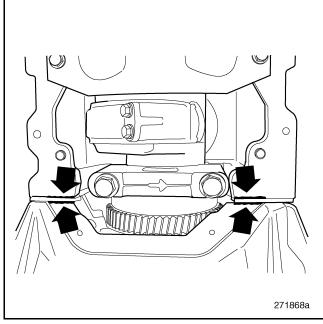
Sealant Points — Flywheel Housing to Timing Gear Plate and Plate to Block
